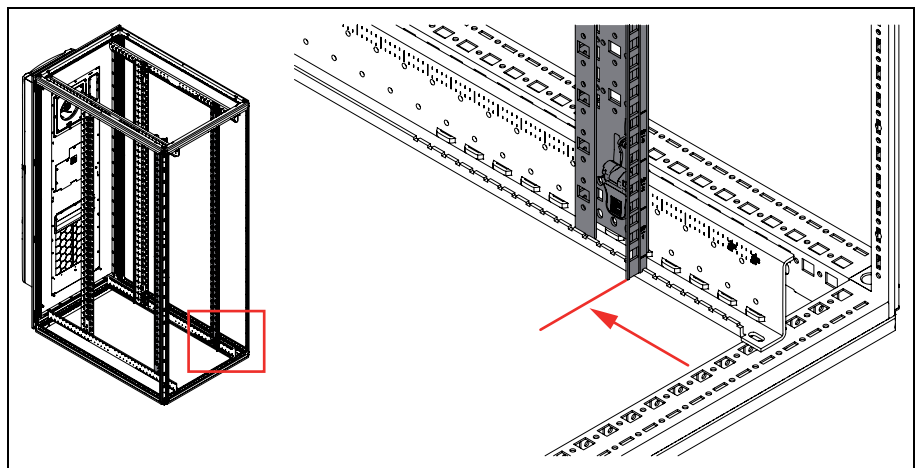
Adjust the front 482.6 mm (19") mounting angle
